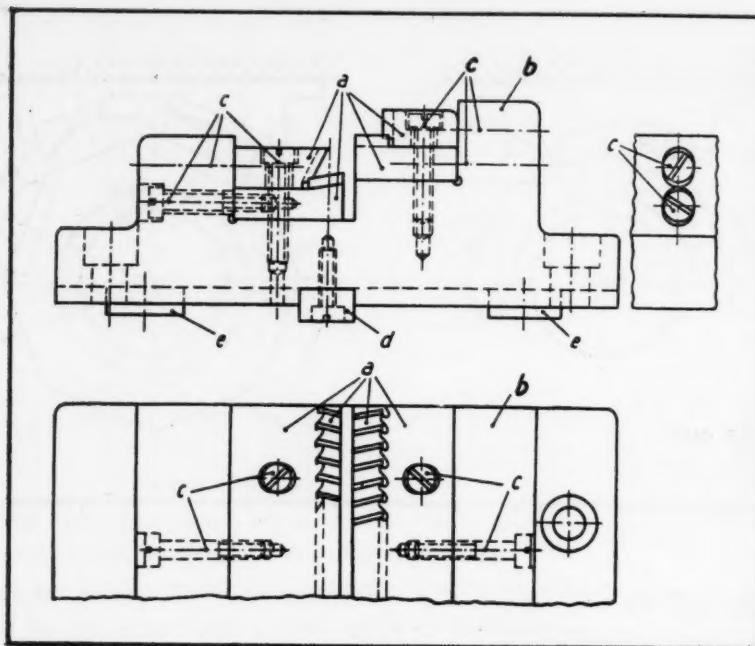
Surface broach with four cutting inserts "a." Adjustment can be made by means of parallel shims inserted between the cutting blades and broach-holder "b." The fastening screws are indicated at "c," the fitting key at "d," and the keys for force transmission at "e"
